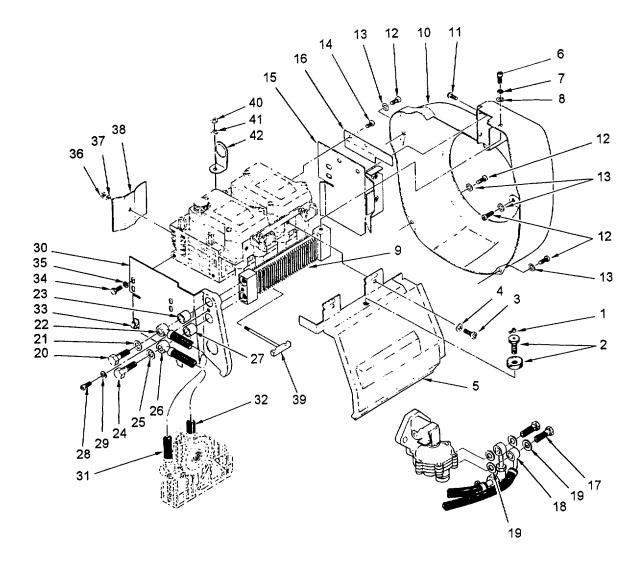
Shroud, Cylinder Casing and Gates Removal
